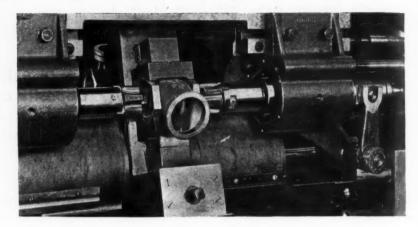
Close-up View of Third-position Spindles of New Britain Chucking Machine, Equipped for Tapping Threads in Brass Valve
